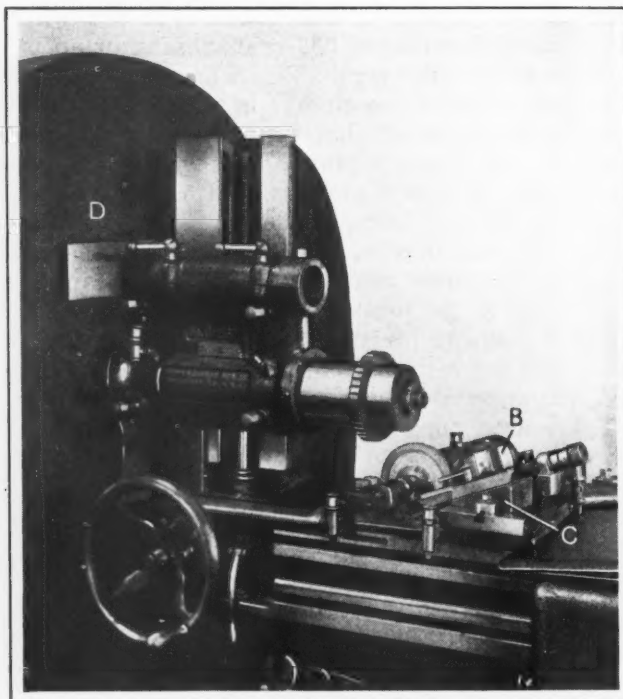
Special Equipment Employed in Grinding Notched-tooth Index-plates
